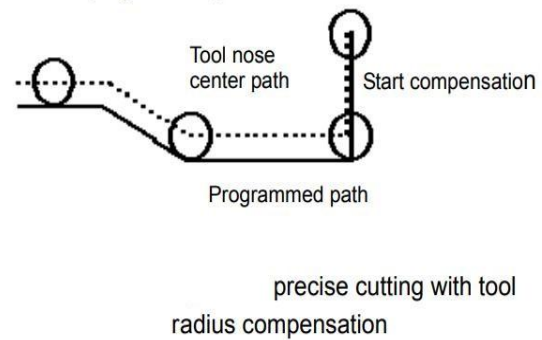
Tool trajectory when programming with the center of the tool tip
